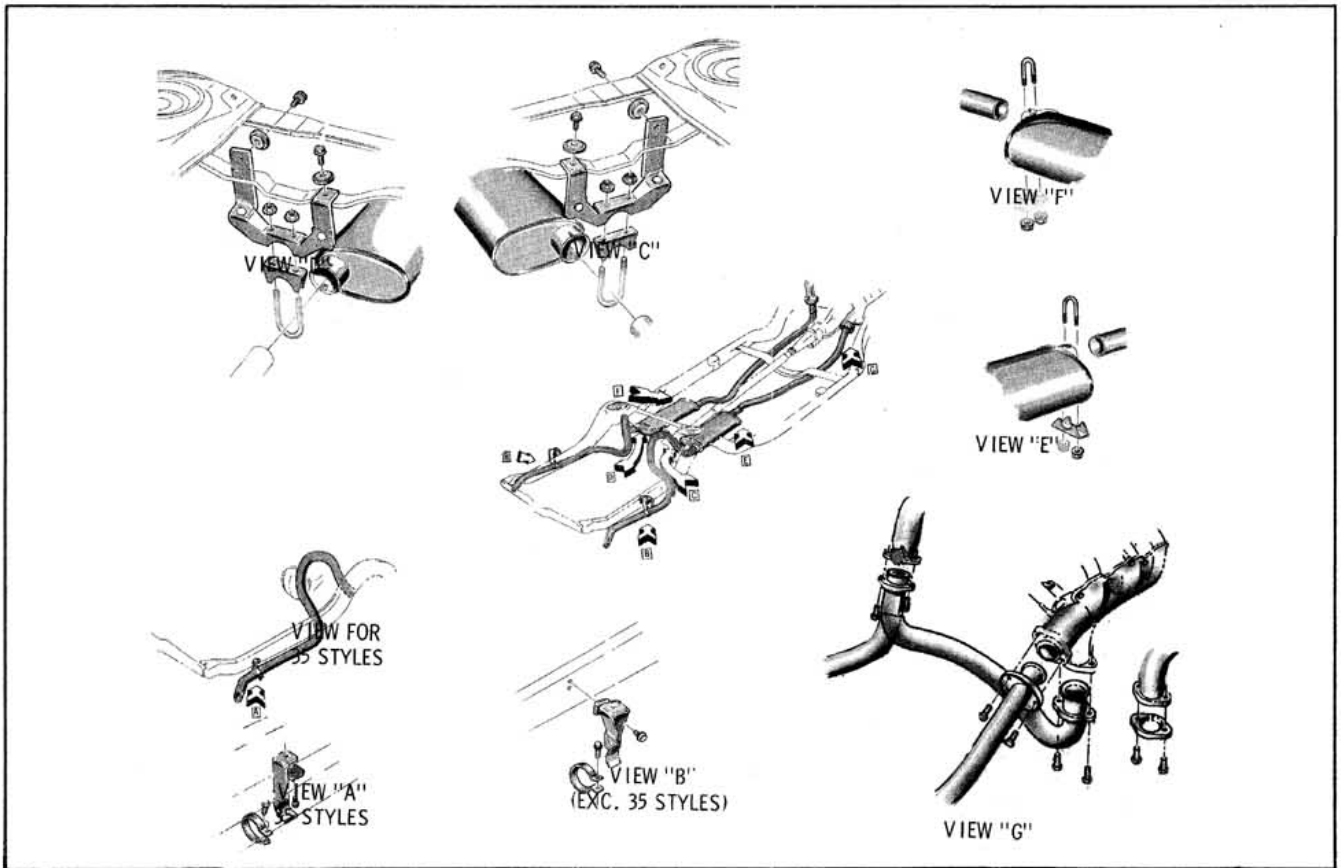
34-36 and 38 Series Dual Exhaust
